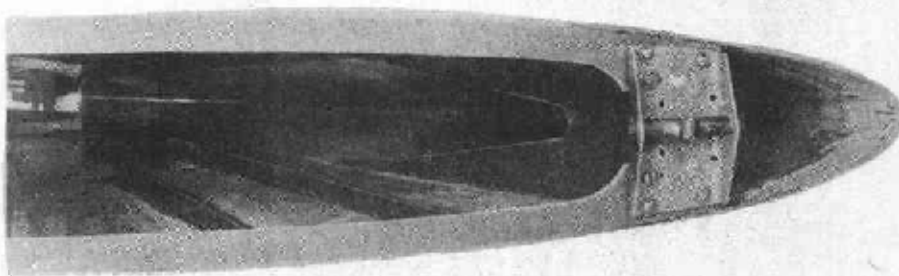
Front stub spar in position in the fin. The drag-load fitting is in place. Bolts through the fitting go through the former and through a molded papreg angle glued to the root of the stub spar.
